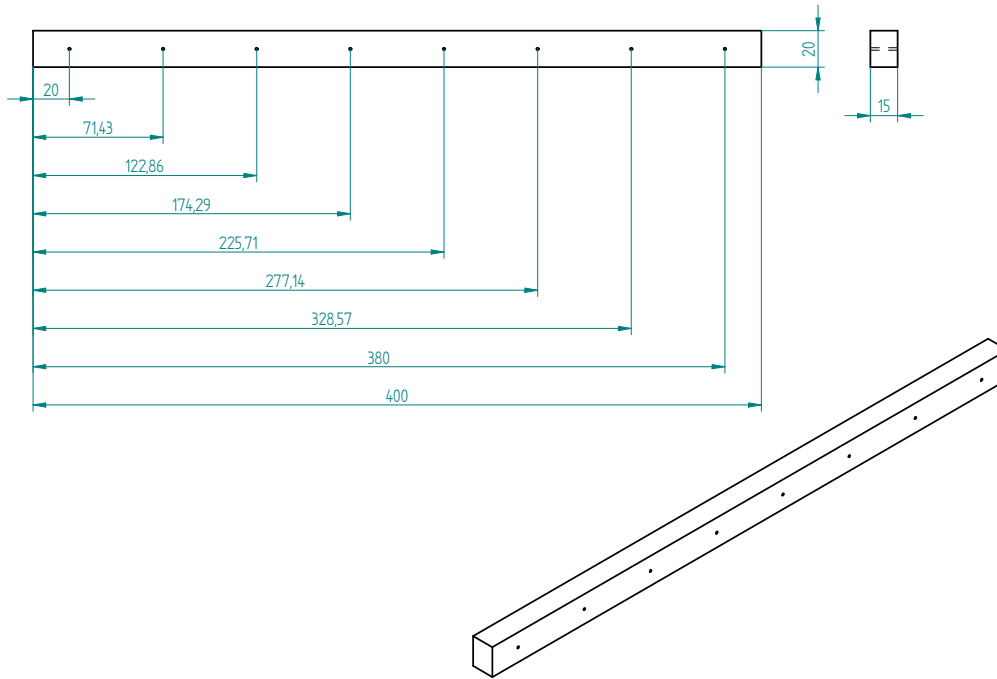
Shaped part : guide for perpendicularator tool
